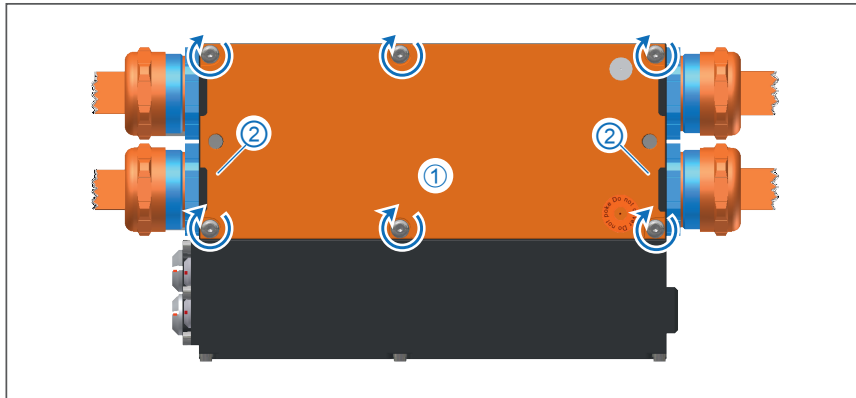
HV BM 1.2, HV power cables and lid mounted
